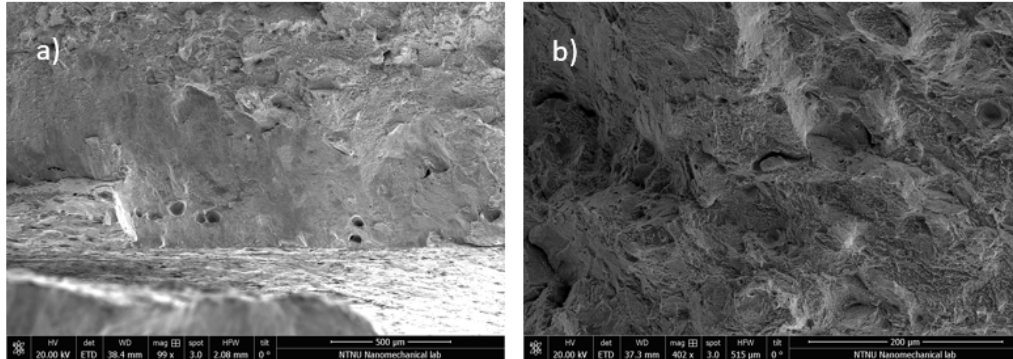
Blunt V-notch specimen failure surface. a) showing pores. b) showing cracks.
